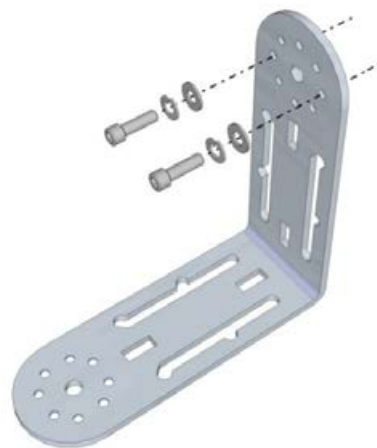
Assembly of BCL 900i and BT 900 using head screws, lock washers and flat washers
